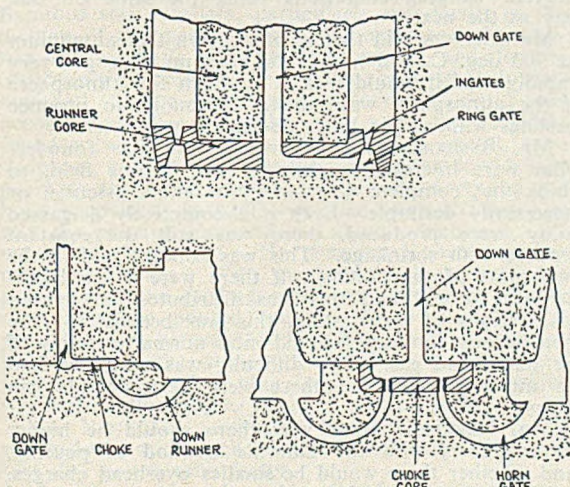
BOTTOM POURING OF CYLINDRICAL CASTINGS, SHOWING THE USE OF HORN GATES.
